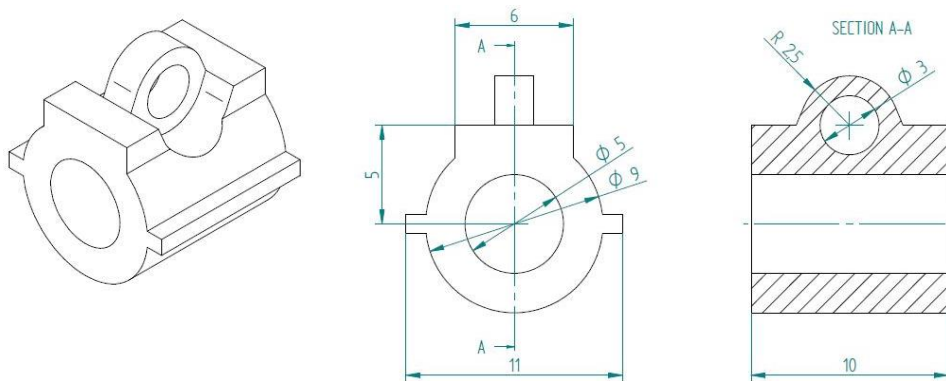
First dimensional model of the slider part. Source: Own elaboration.
